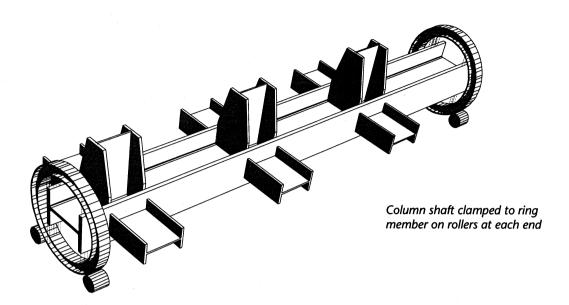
Column manipulator for welding beam stubs to columns
